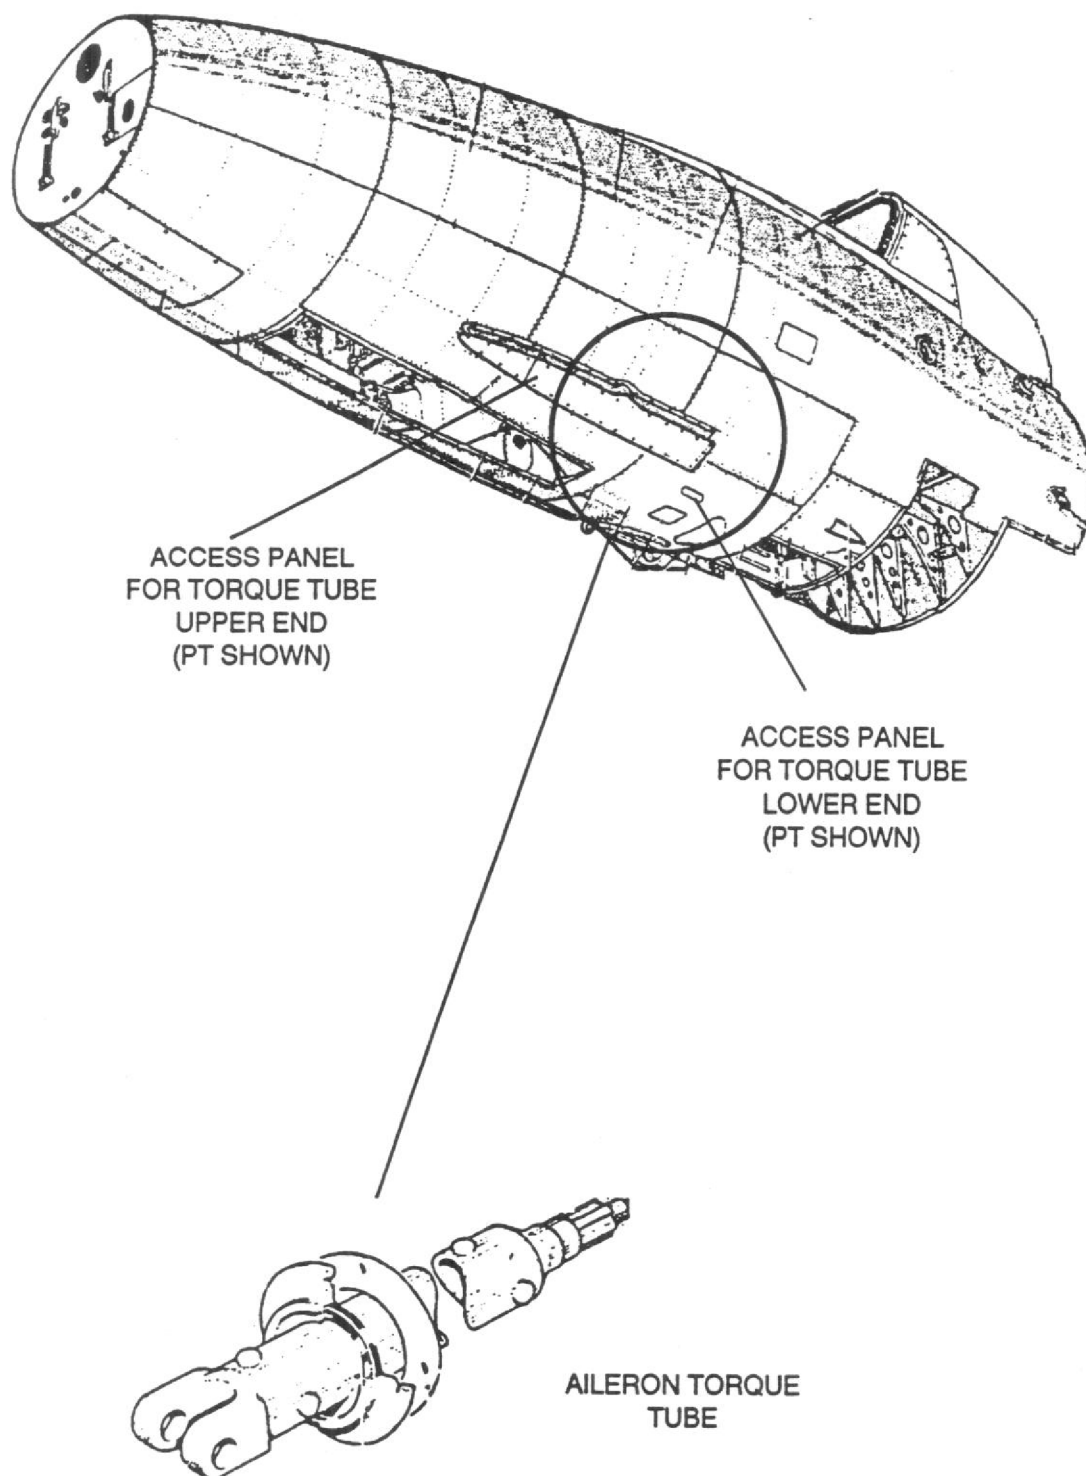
Aileron Torque Tube (Port shown Starboard similiar)
